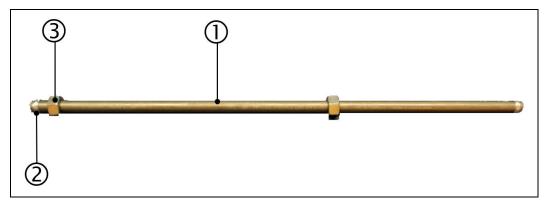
Pipe with screw fitting, installation kit for VN2020 series
